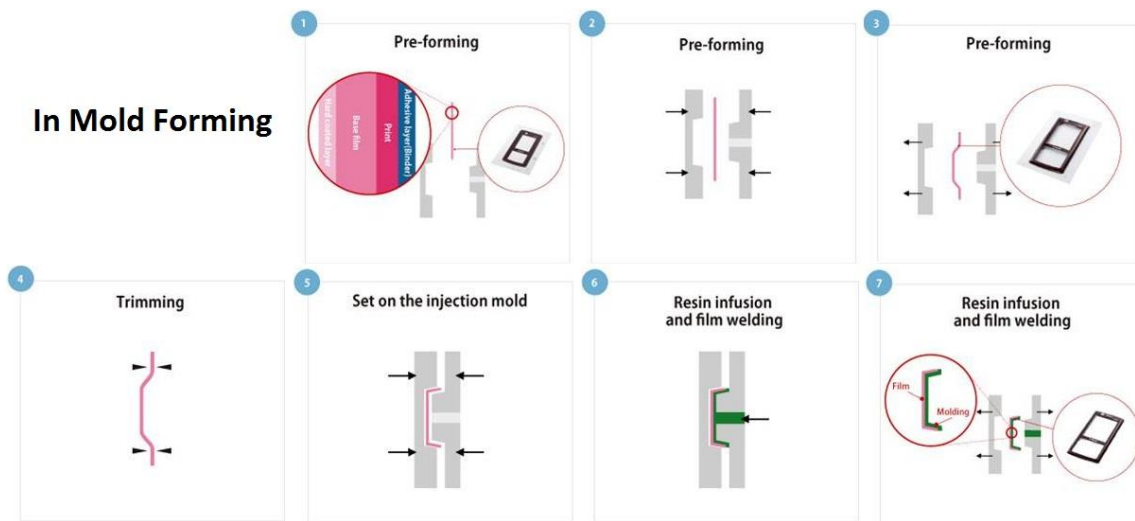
Process of in-mold forming (TORAY INDUSTRIES, 2014)
